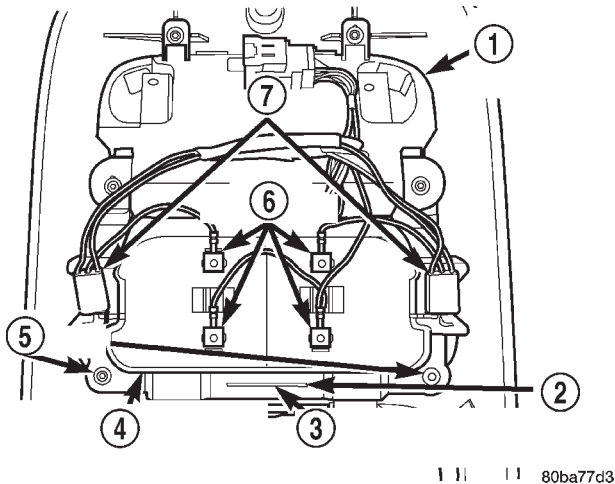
Overhead Console Reading and Courtesy Lamp Housing Remove/Install
